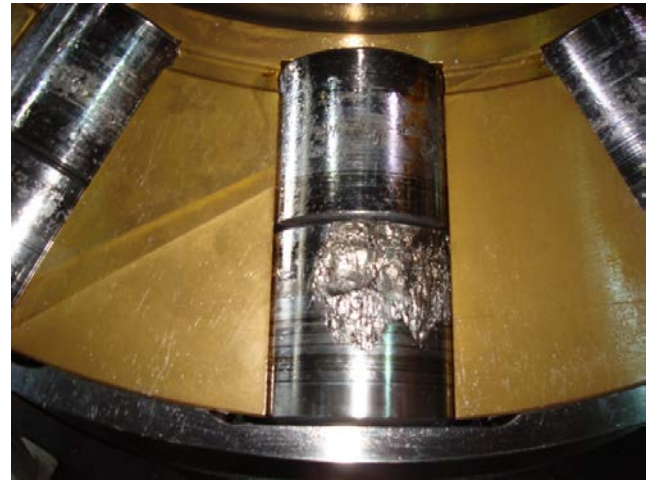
Extruder Gearbox 2 Stages Tandem Bearing Roller - Damaged Condition
